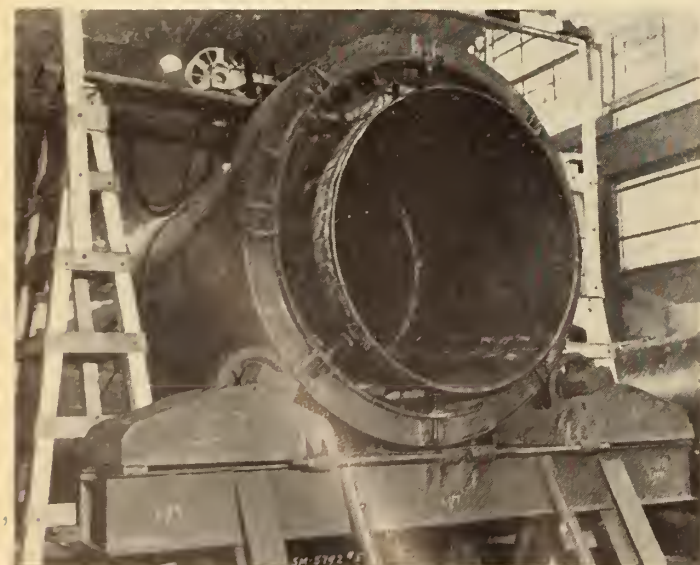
Welding outside of girth seam between first and second courses and large auxiliary ring used to compensate for eccentric course.
